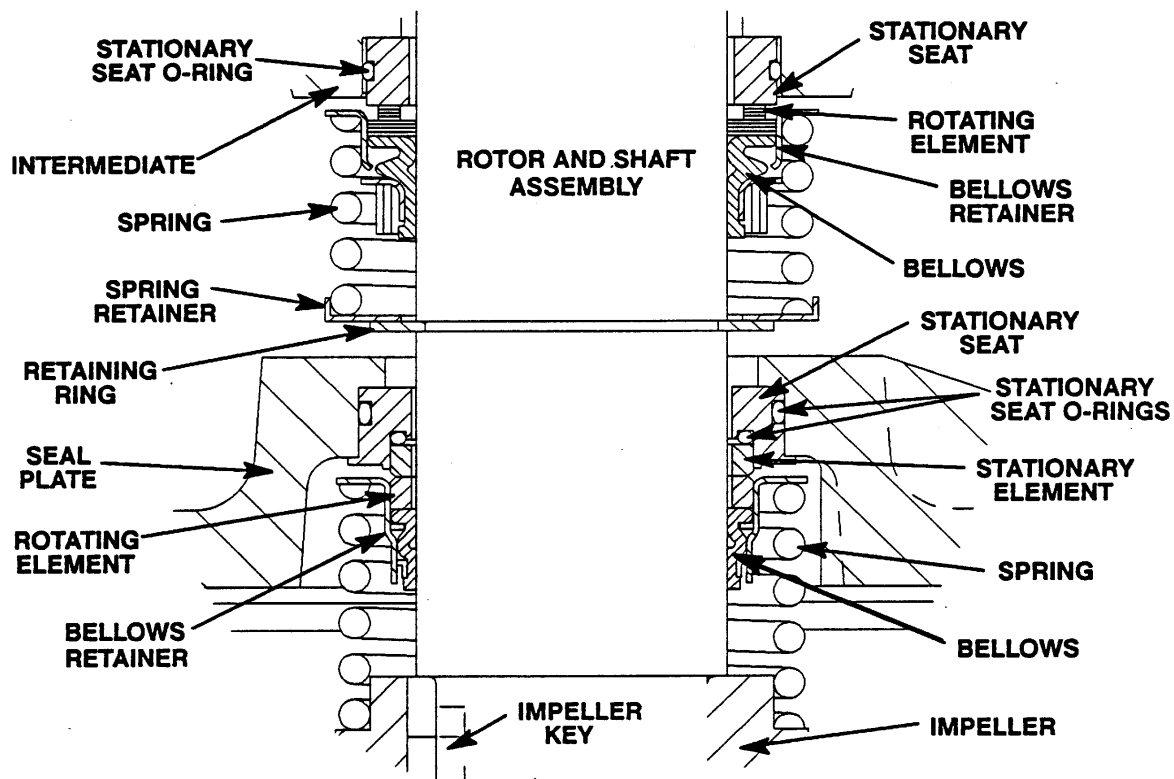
46512-250 (Lower) And 25271-291 (Upper) Seal Assemblies
